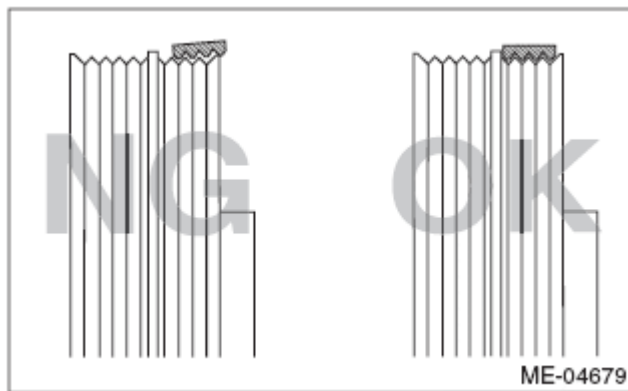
Caution For Placing Rib On Crank Pulley Groove
